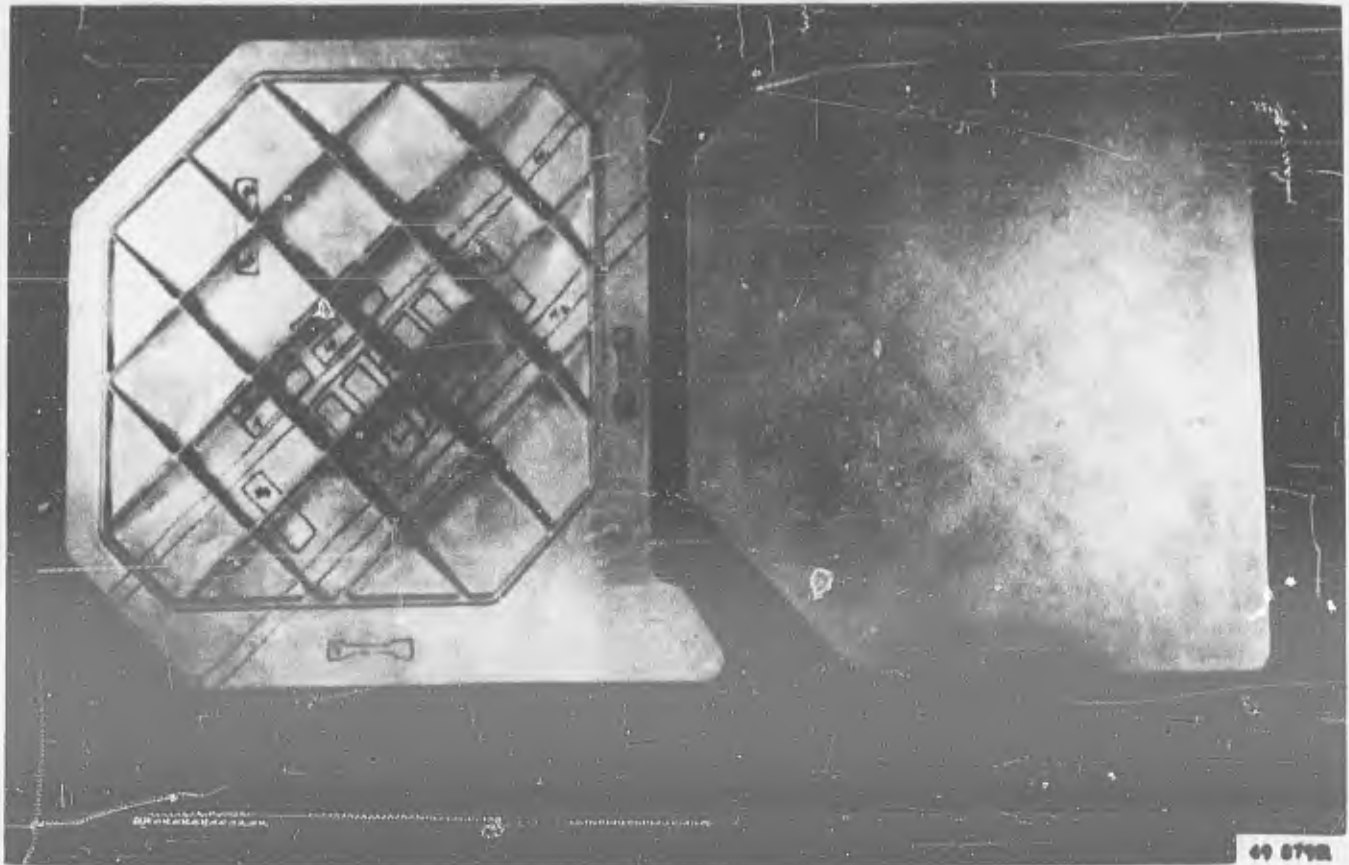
Typical panels as received showing location and identification of macro and tensile specimens.
